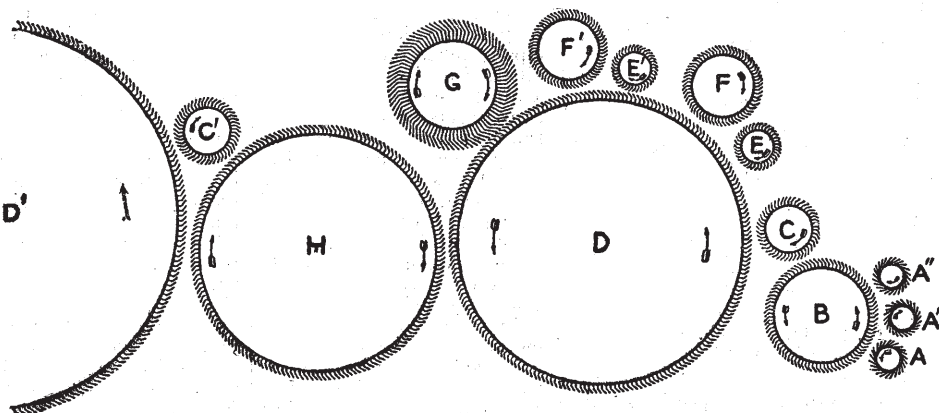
Sectional View of Carder; illustrating the principles of carding.
